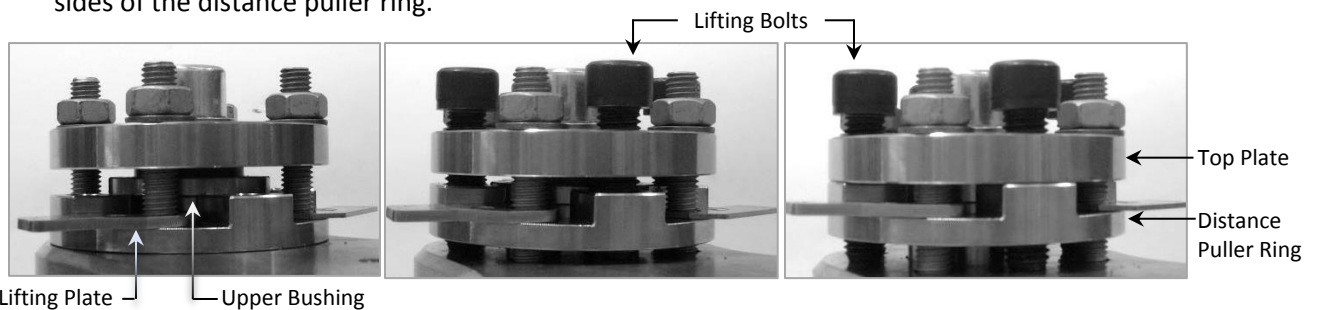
Side view of tapered pin as pin is disengaged. Step 12, lifting plates engaged (left). Step 13, lifting plates contact collar of upper bushing (middle). Step 14, upper bushing raised (right).
